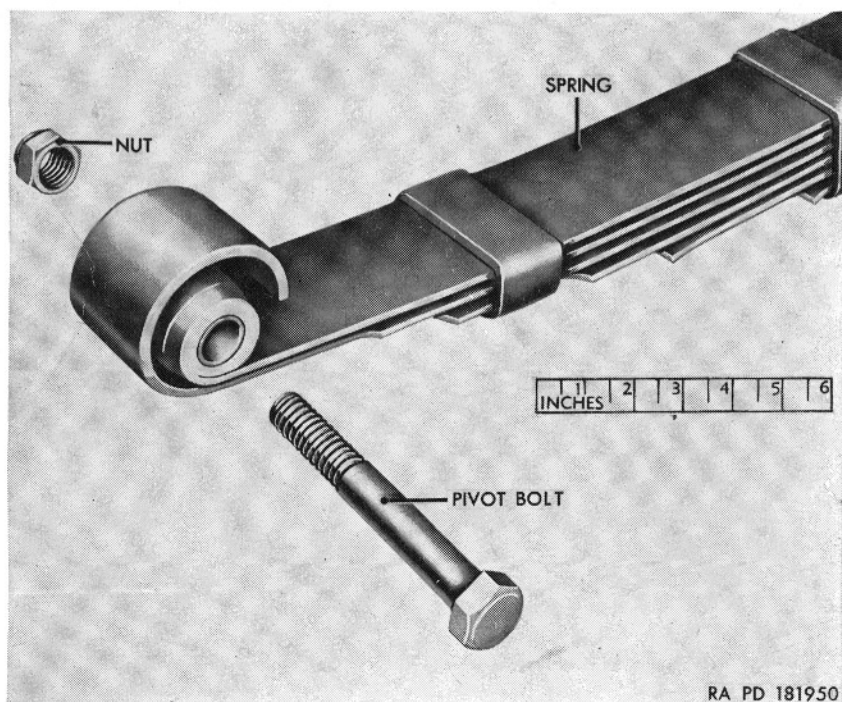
(Added) Pivot bolt and pivot bolt end of spring M170—Exploded view.
